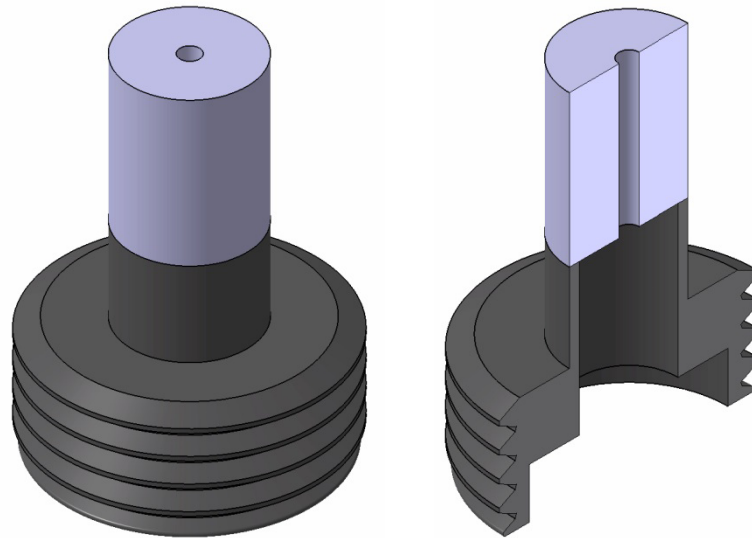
Bottom (left) and section (right) view of the circle long die.
